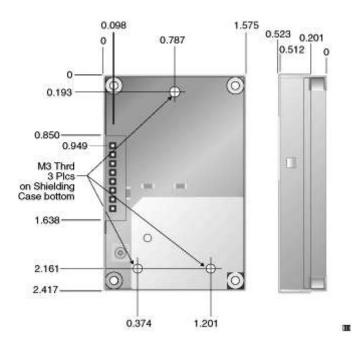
G8 Version 2, Shield Case Dimensional Drawing Top View (transparent cover) and Side View
